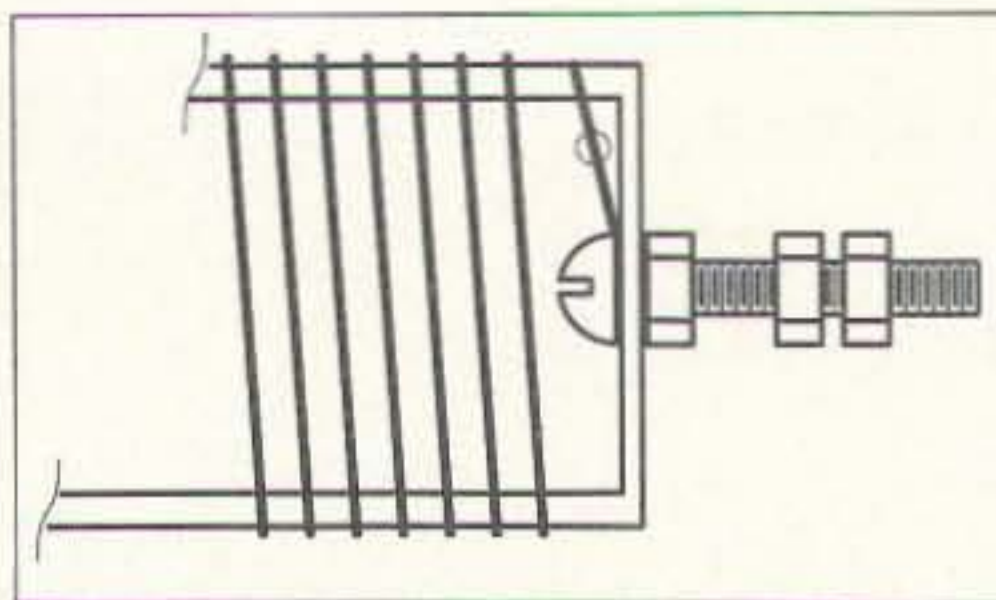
A small machine screw-and-nut assembly provides coil strain relief.
